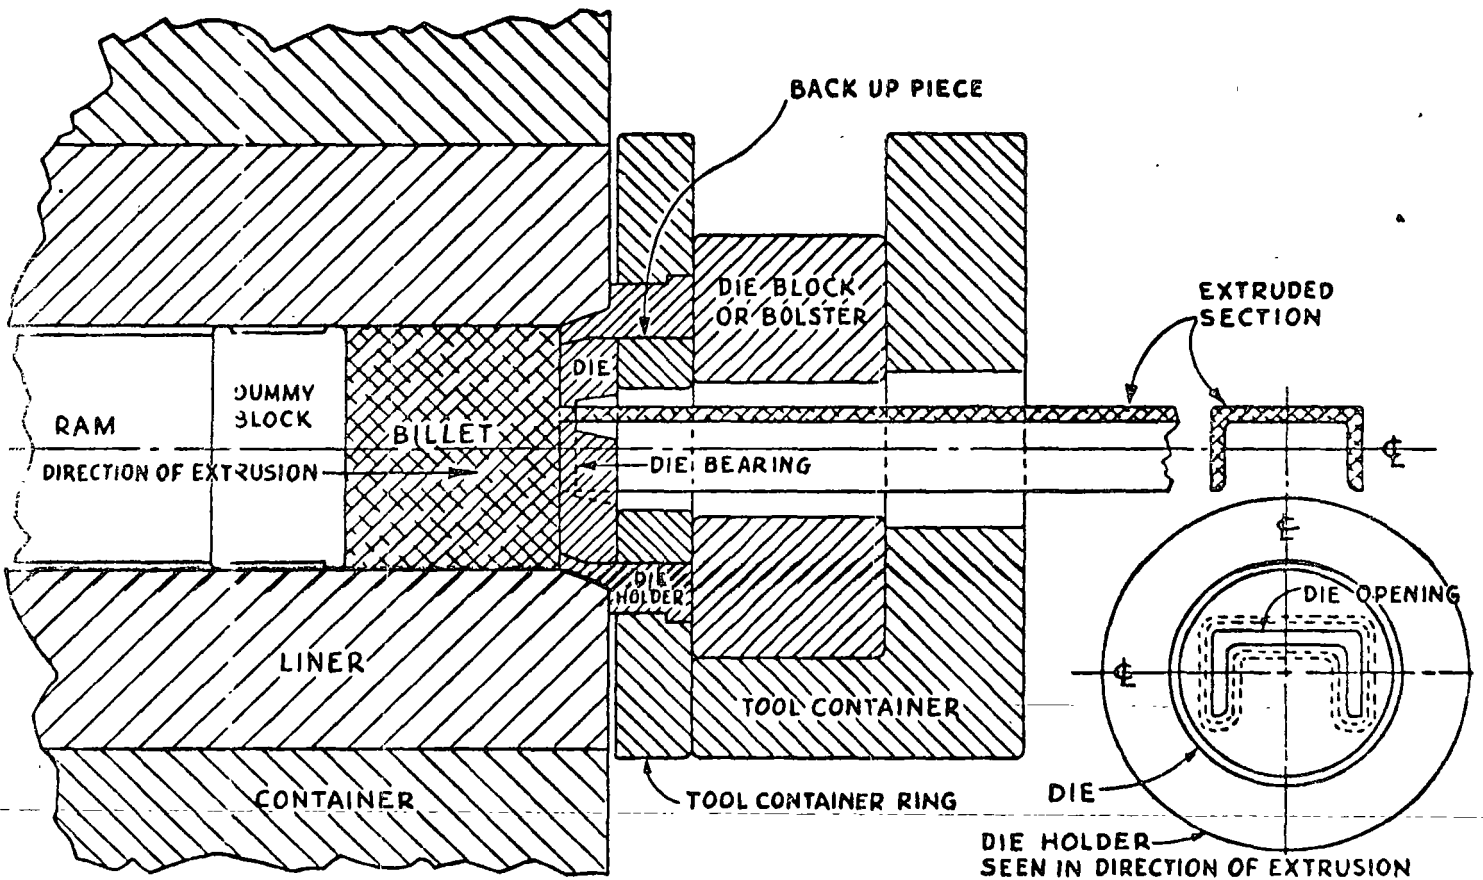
Steel tools for producing aluminum shapes consist of die, back-up block, die holder, die block and tool container. Extrusion billet diameters range from 4 to 11 inches.
